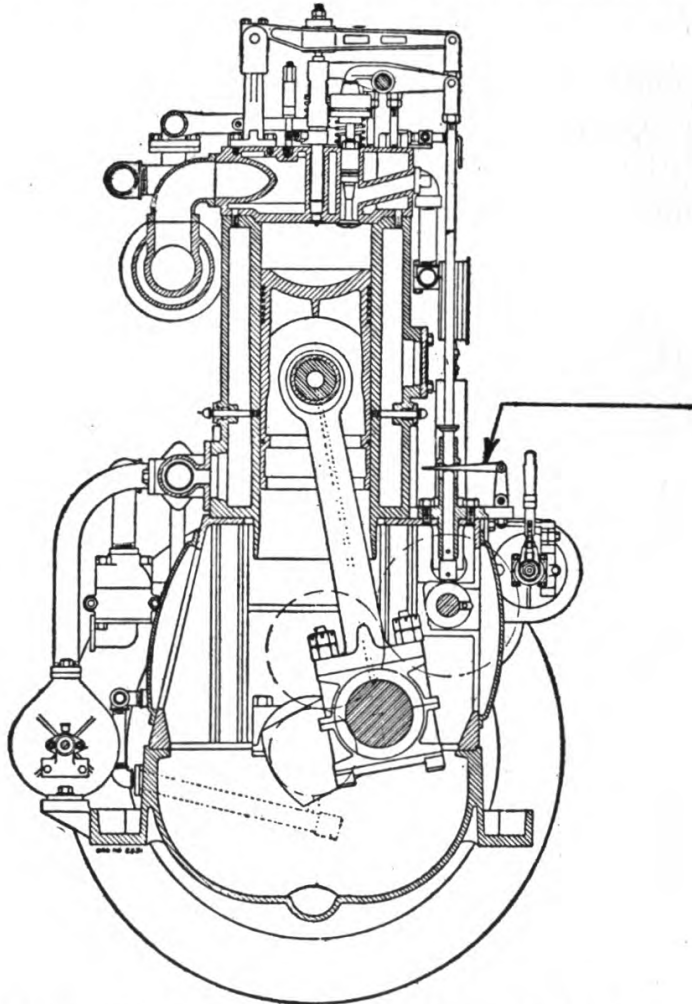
Solid-Injection Diesel Using Common-Rail and Mechanically Opened Spray Valve
